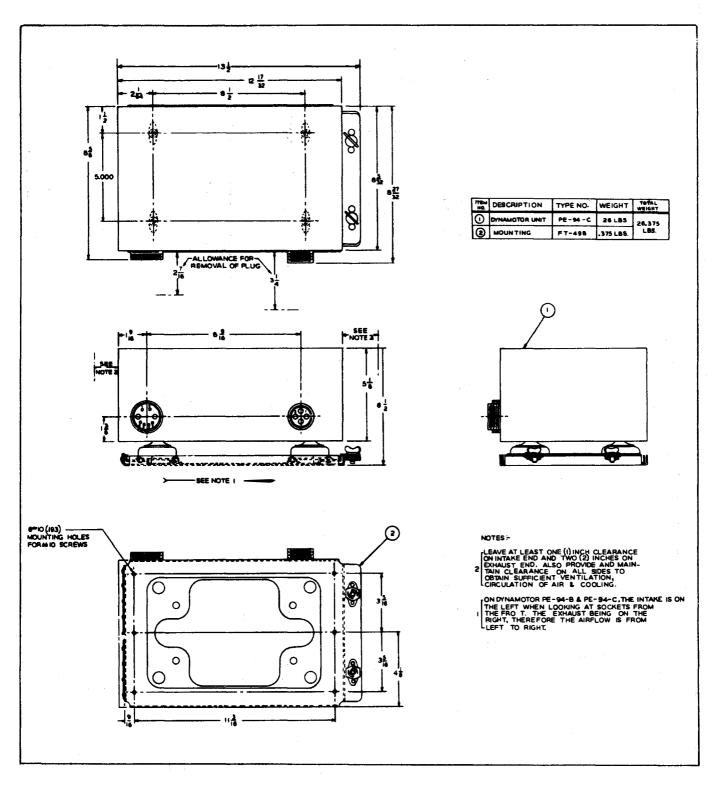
Dynamotor Unit PE-94-C—Installation Dimensions
